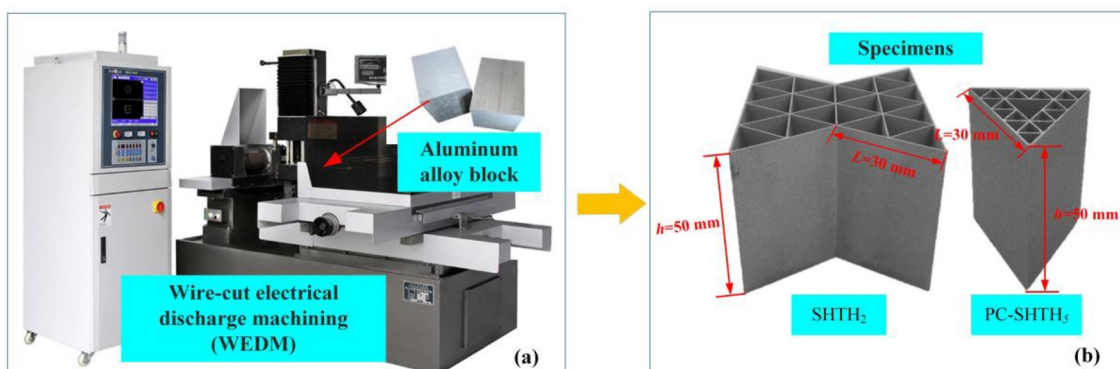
Experimental preparations: (a) wire-cut electrical discharge machine; (b) specimens: STHH₂ and PC-SHHH₅.
